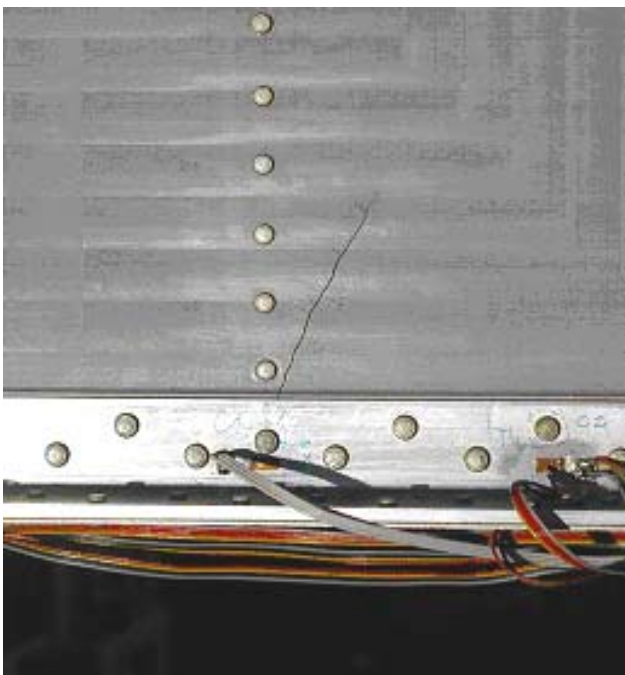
Critical area C1 - riveted connection of spar web and lower flange plate (after fatigue test finish).
